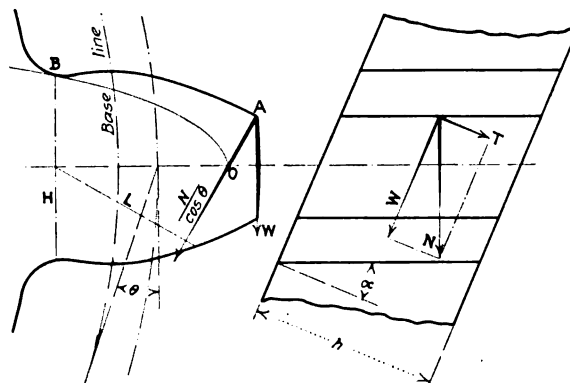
FORCES ACTING ON HELICAL TOOTH
